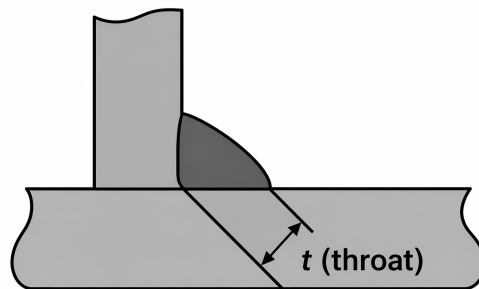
Illustration showing the weld throat. The throat represent the shortest distance between the weld root and the weld face [20]. The weld throat dimension was varied in the parameter study by increasing and decreasing the size.
